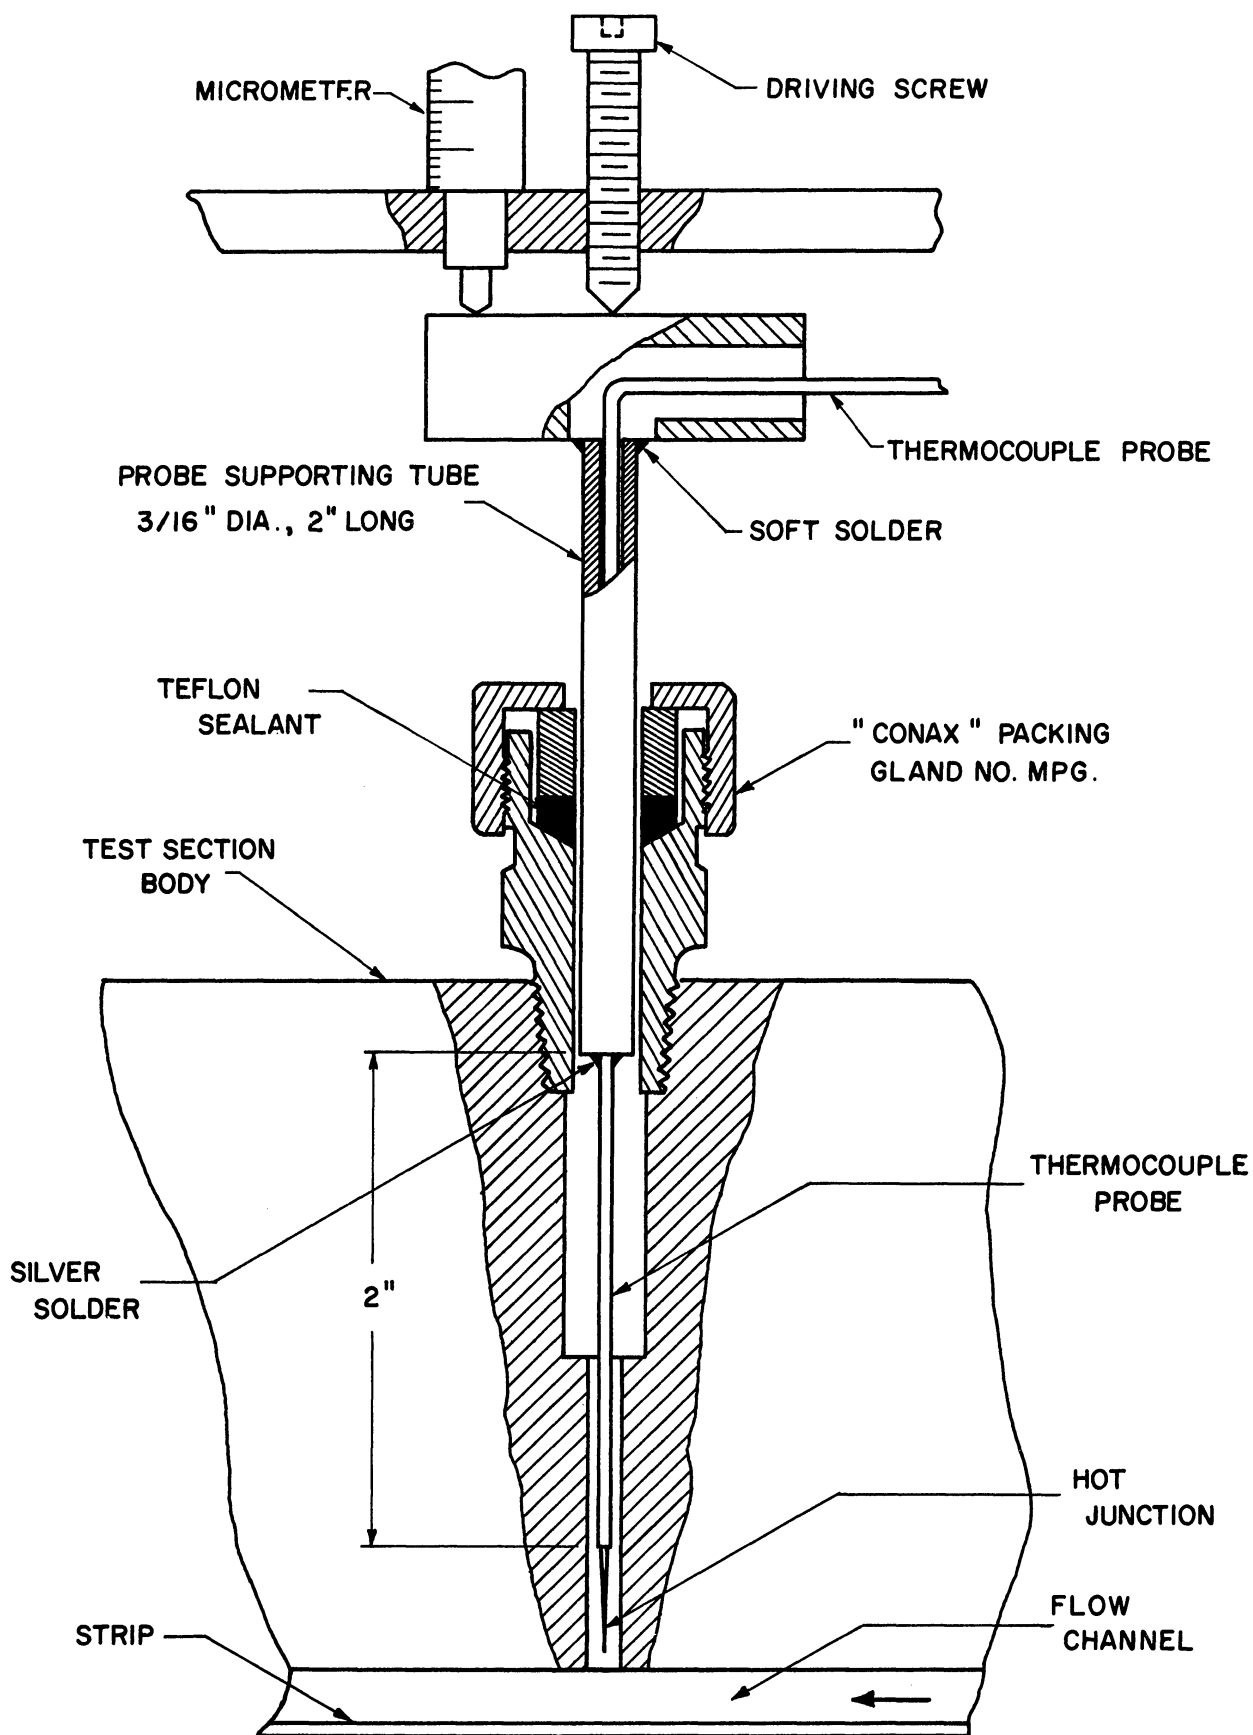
Driving Mechanism and Sealing Gland for the Traversing Thermocouples
